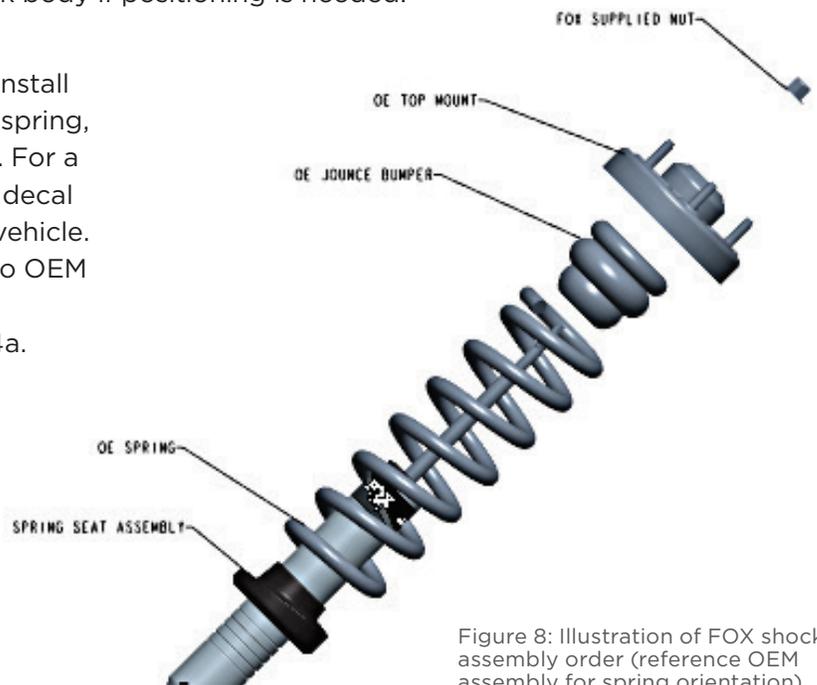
Illustration of FOX shock assembly order (reference OEM assembly for spring orientation)
